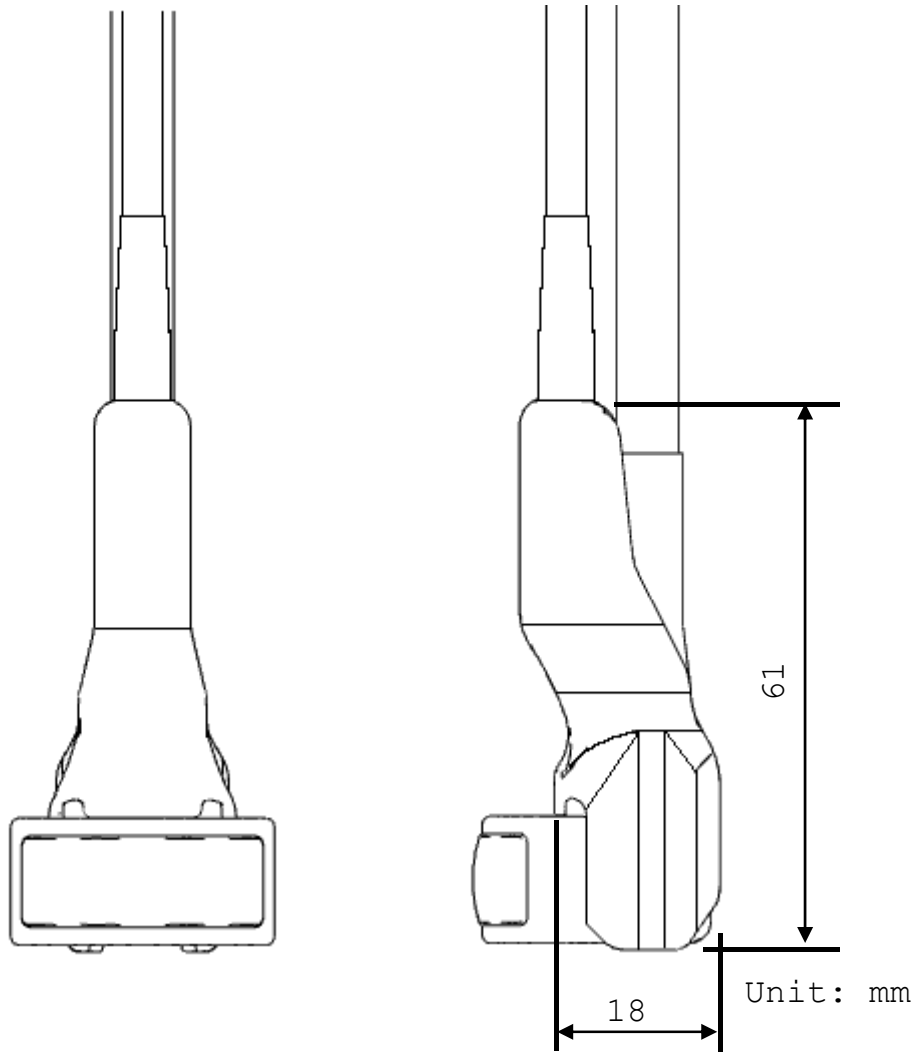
External view of the probe EUP-0732T with the Magnetic Sensor Attachment (Option)
